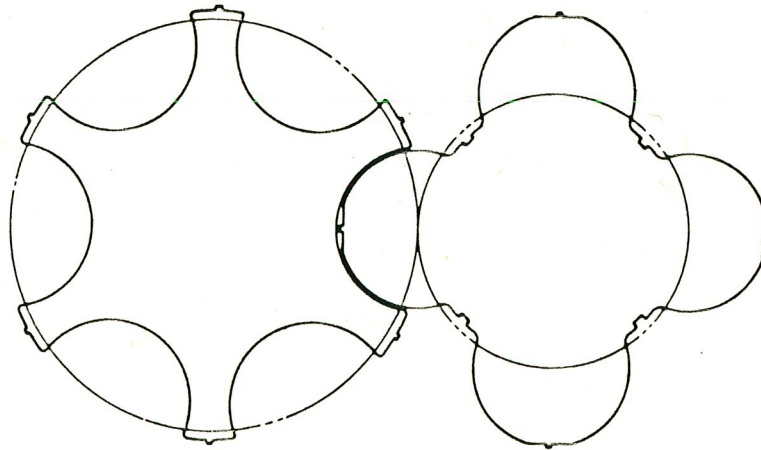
Rotor Profiles of Helical Screw Compressor
